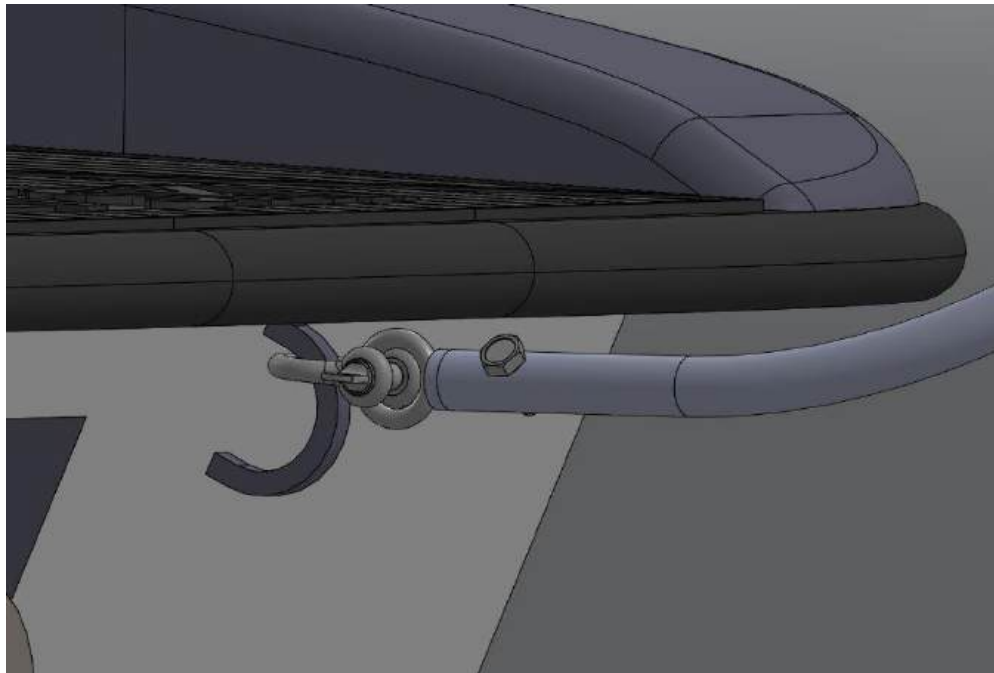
Shackle Connecting Jet Ski and Back Mechanism
